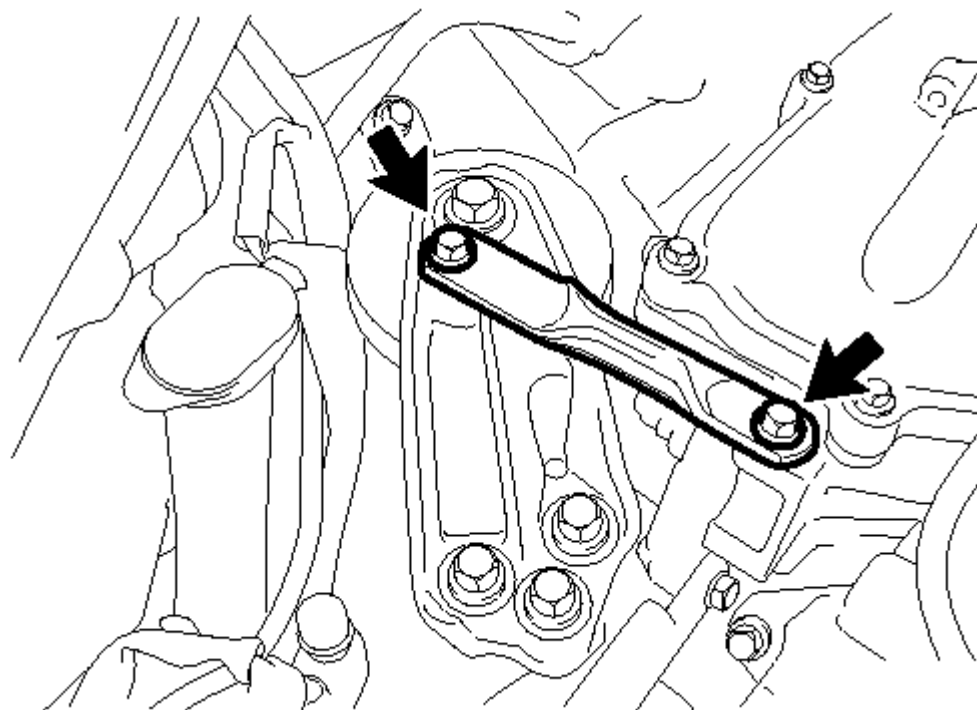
Identifying Engine Mounting Stay RH Bolts
